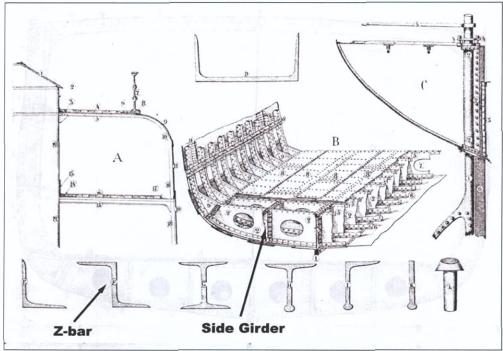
Illustration showing side girder framing and Z-bar like that found on SS16B (after Paasch 1890 Plate 29)
